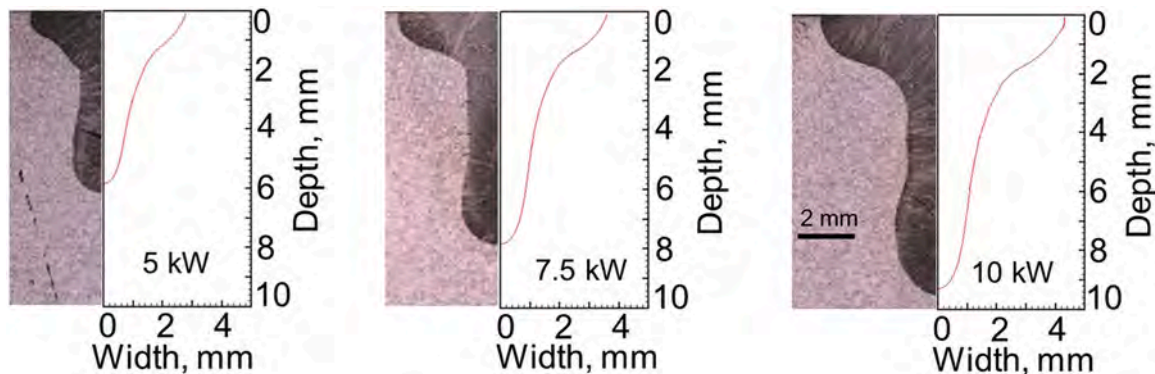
Comparison of calculated and experimental weld geometry for different laser powers for a welding speed of 12.7 mm/s using 0.524 mm laser radius and 12.7 mm thick plate.
